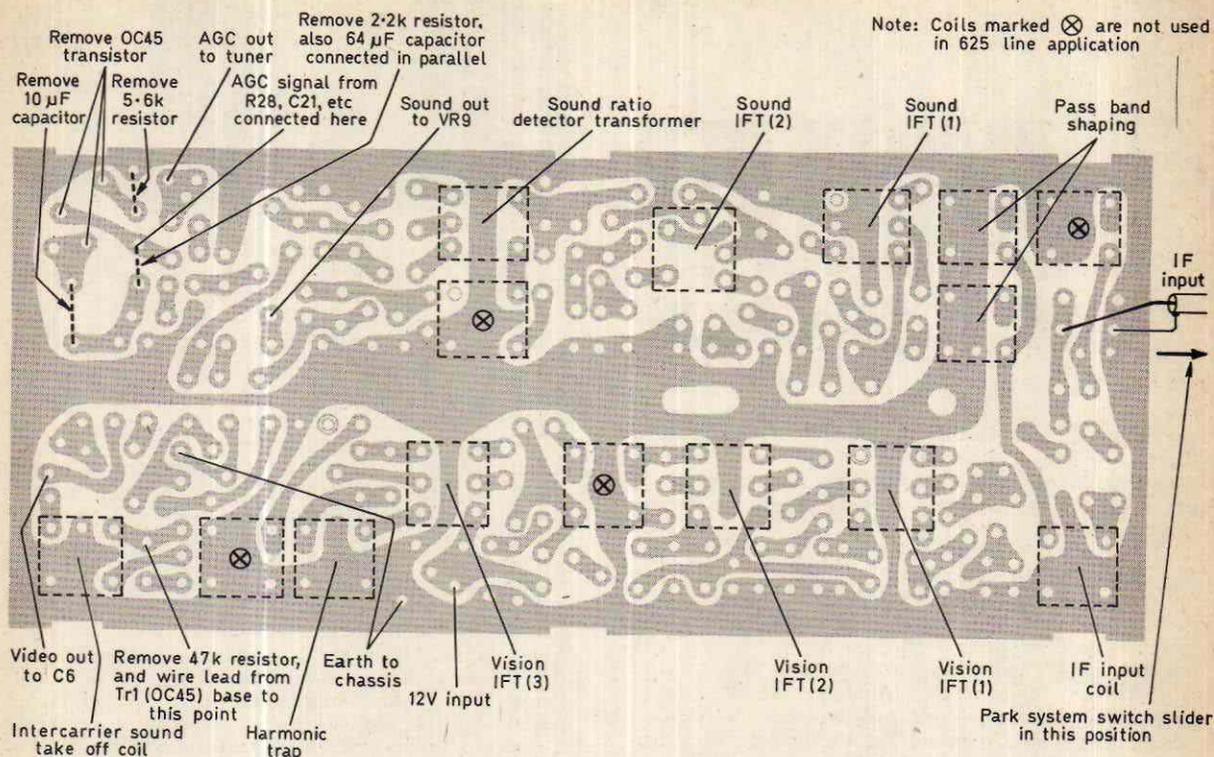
The i.f. panel viewed from the foil side, indicating modifications required. Coils marked with a cross in a circle are not used on 625 lines.
